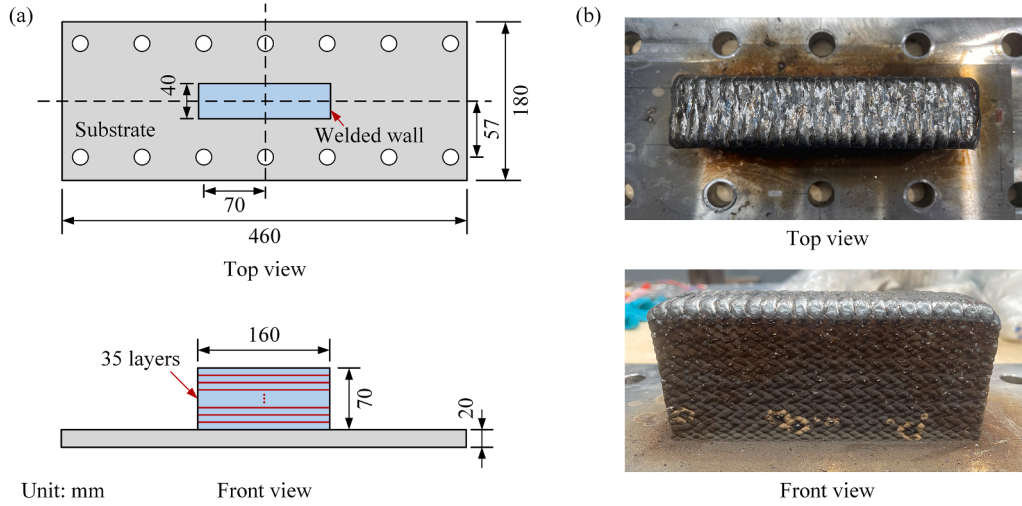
Schematics of: (a) Designed component; and (b) Manufactured component.
